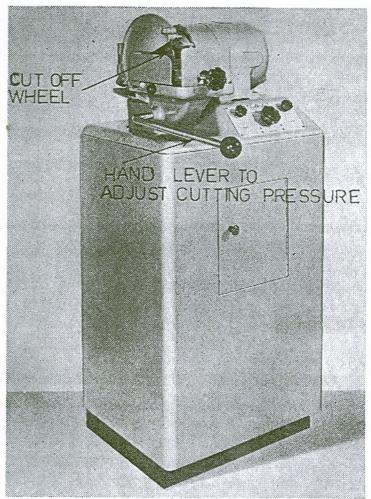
Specimen cut-off machine. (Courtesy of Buehler Ltd. USA)
